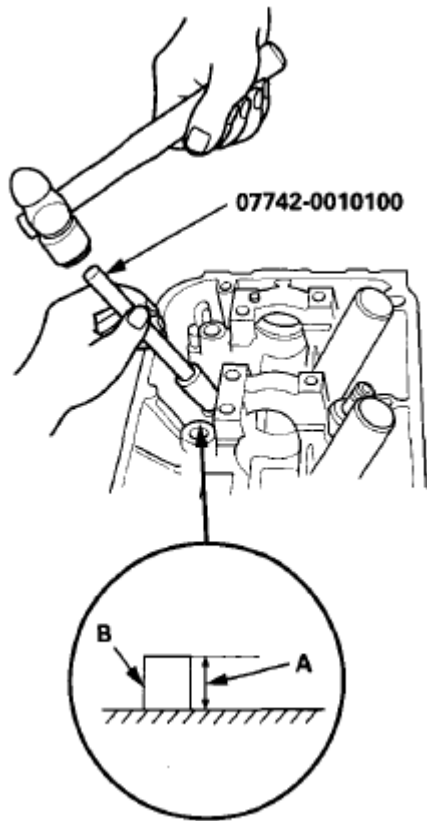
Identifying Dimensions Of Valve Driver Guide
